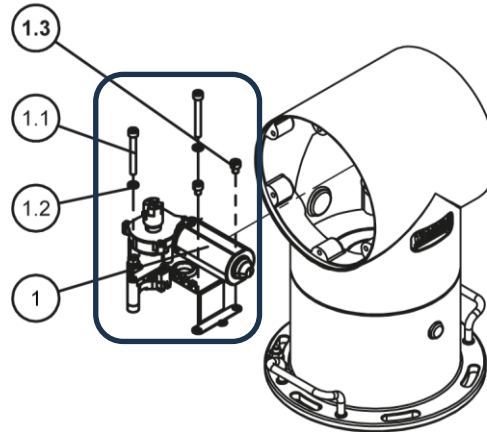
Exploded view of Pan/Tilt unit with Engine unit
